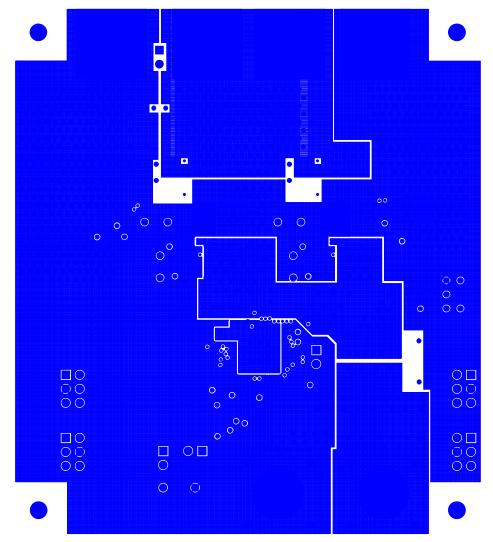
PCB - INNER LAYER 4 (TOP VIEW)
